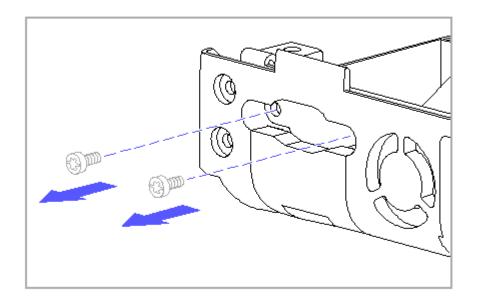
Removing the Rear Internal AC Power Supply Screws
